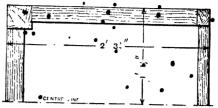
Half Plan of Easy Chair Seat Frame.
